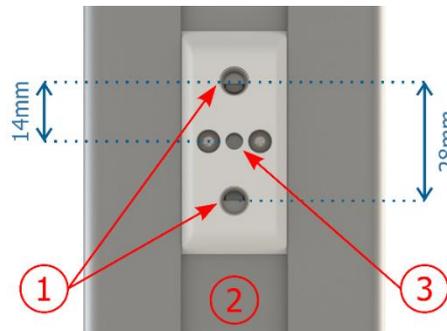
Mounting Mechanism Specifications: 1) Thread for 1/4" screws; 2) Rail for changing the fixing point; 3) Ø4 mm hole for guide pin
